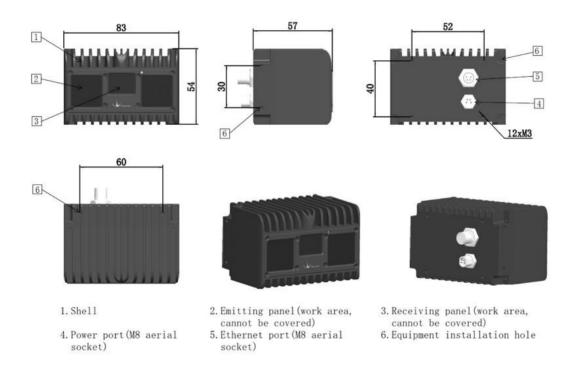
Dimensional drawing of CE30-D (Unit: mm)
